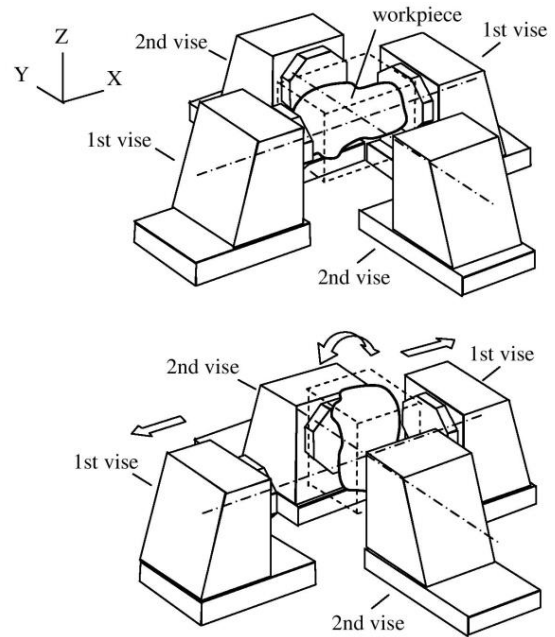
Basic concept of the Dual-Dexterous-Vises system; (Top) the first vise in action; (Bottom) "holding transfer" by actuating the second vise before releasing the first vise [21].
